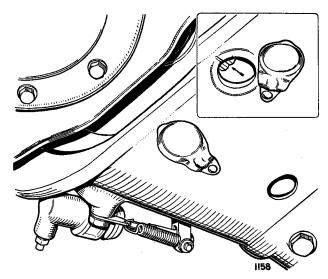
Top dead centre marks at the bottom of the clutch housing.
